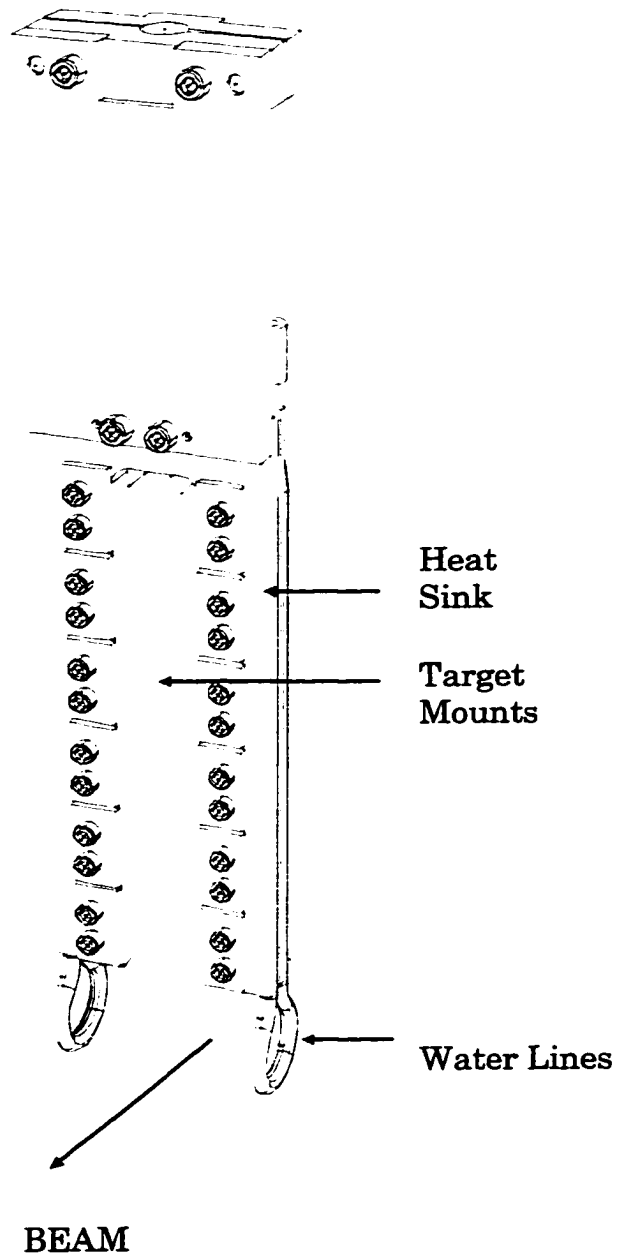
Downstream view of the bremsstrahlung radiator target mount/heat sink. View shows clamps, heat sink, and waterlines, which wrap around the back (upstream side) of the target.
